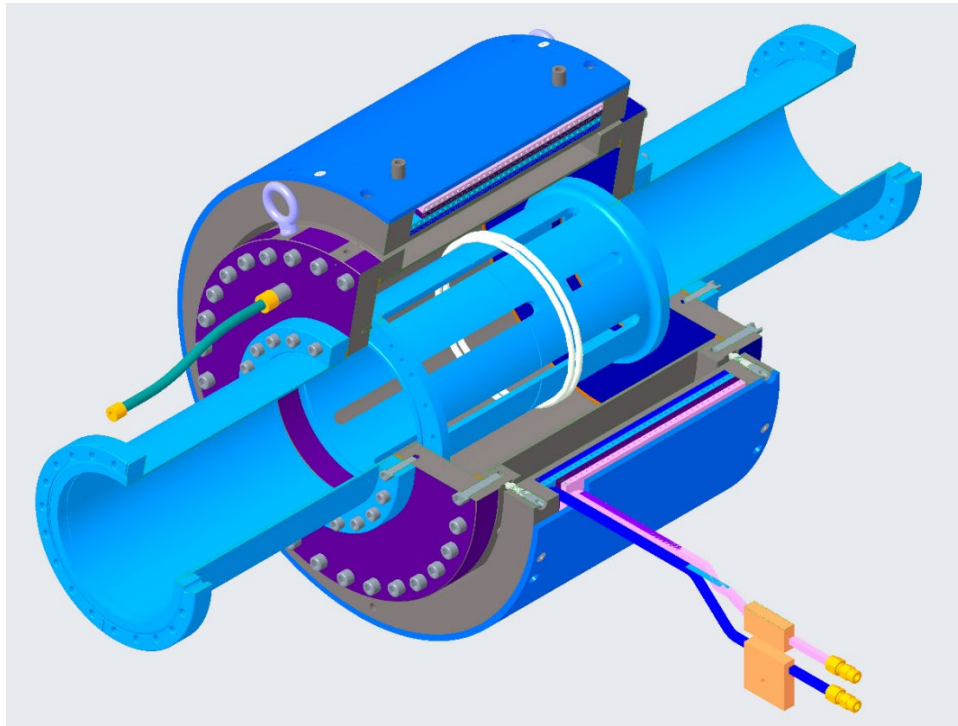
CAD drawing of the diamagnetic loop apparatus.
